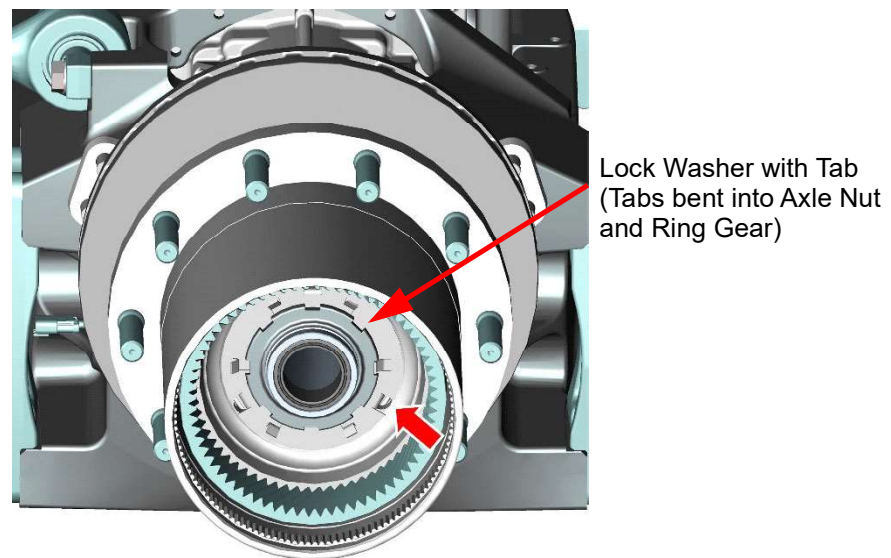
Straightening Tab on Axle Nut Lock Washer
